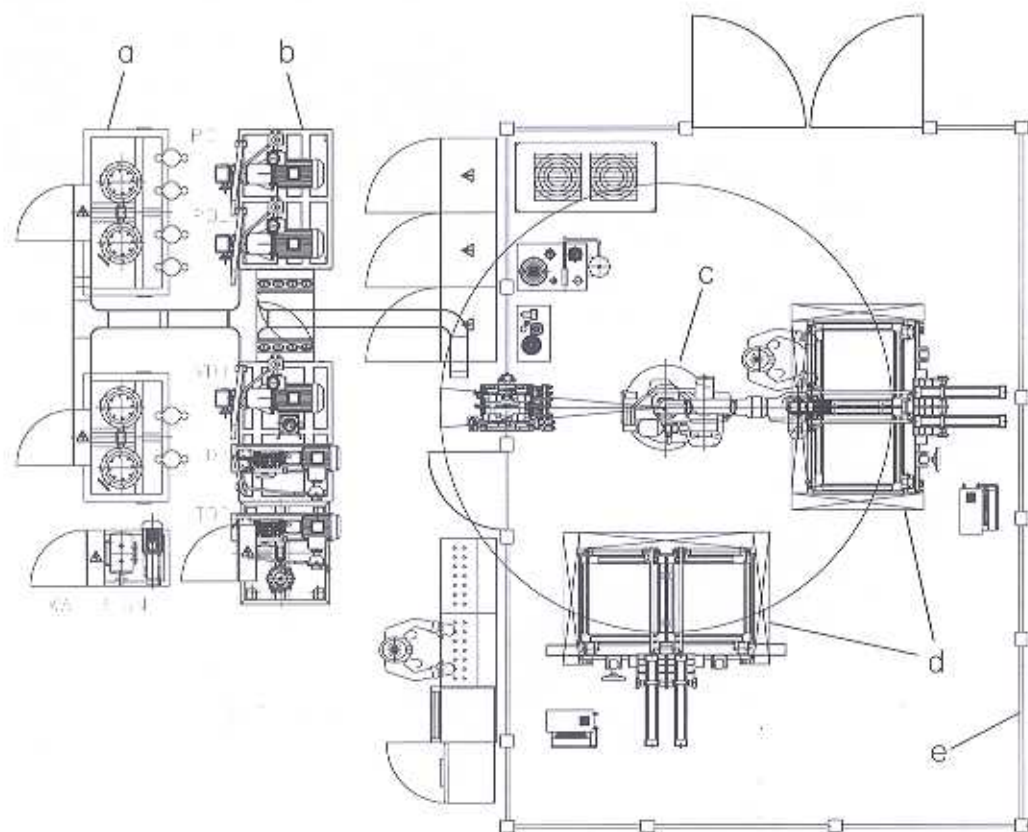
Layout of a plant for producing moldings by open-mold filling technology
